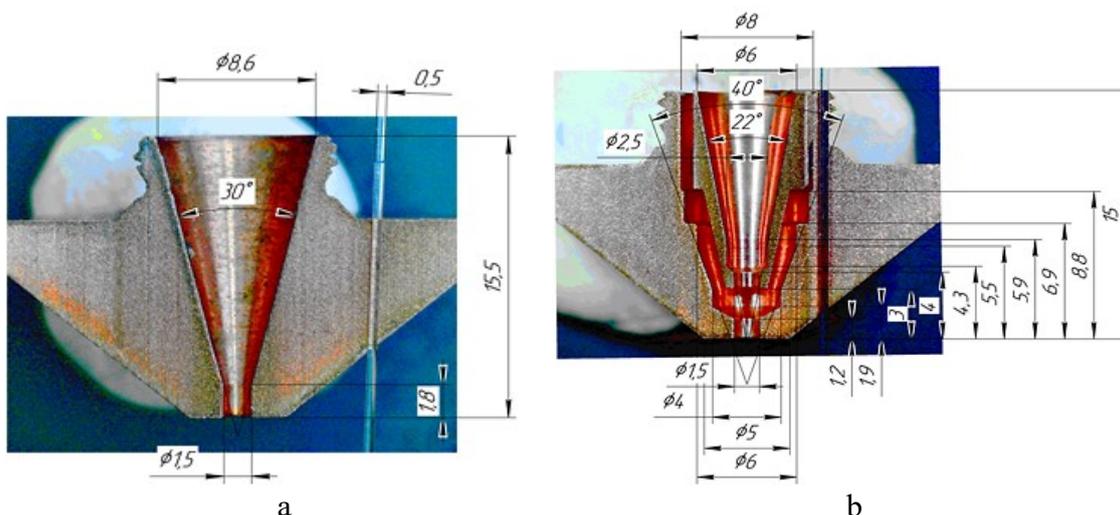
Configuration and geometric dimensions of Thermacut's standard single-channel (a) and dual-channel (b) nozzles with a center bore diameter of 1.5 mm
